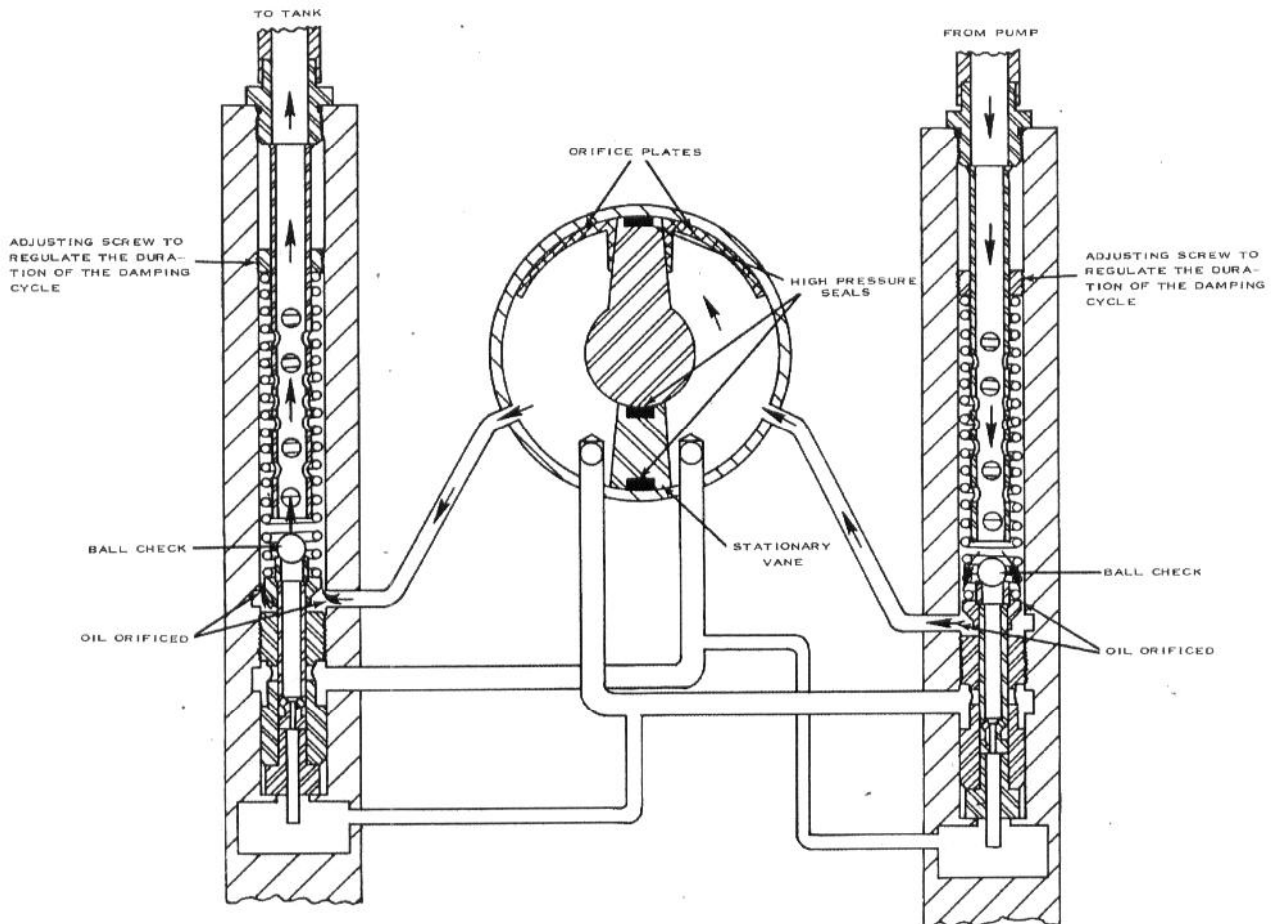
Identification of Cushioning Mechanism — MF Part No. 729 829 M91
